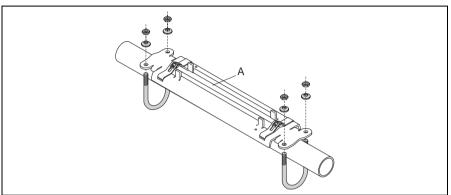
Mounting the Prosonic Flow-sensor holder (DN 15 to 65 / 1/2 to 21/2") with U-shaped screws
